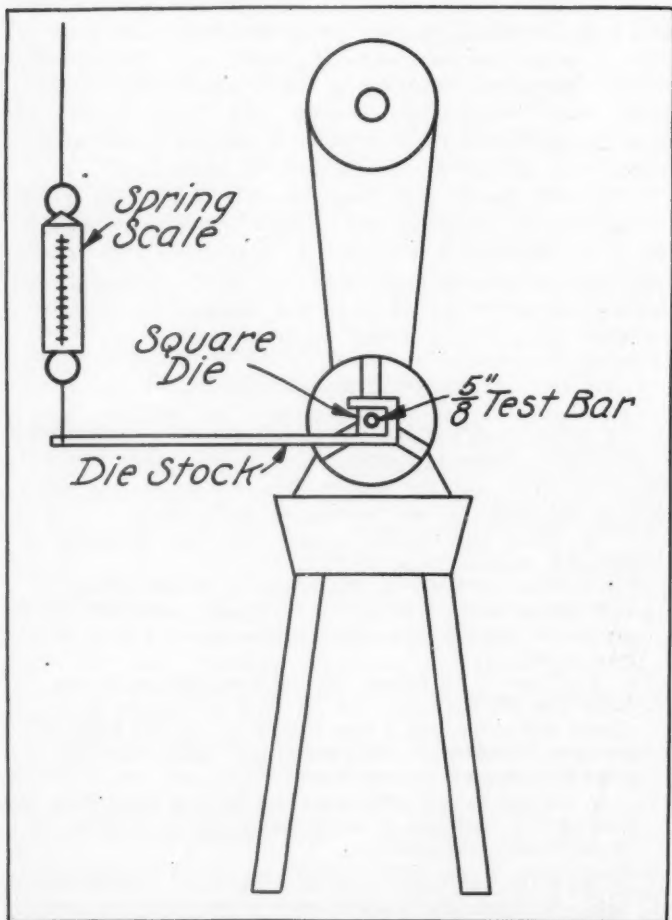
END VIEW OF MACHINABILITY TESTING DEVICE
